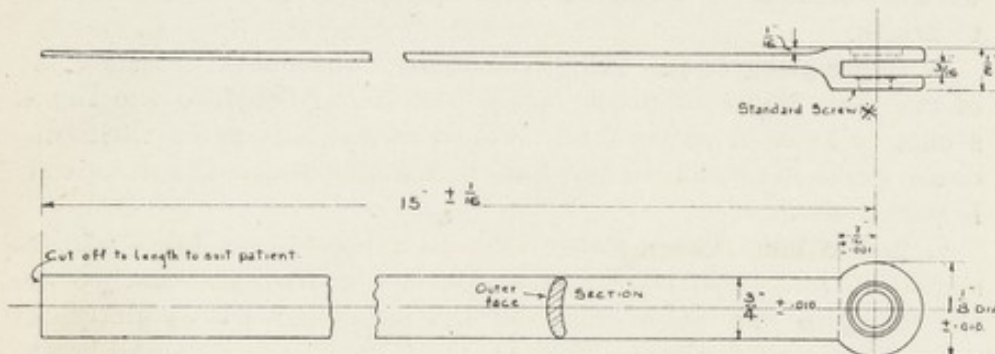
KNEE-JOINT, LOWER STEEL, FOR BELOW KNEE LEG (LEATHER SOCKET ONLY).
